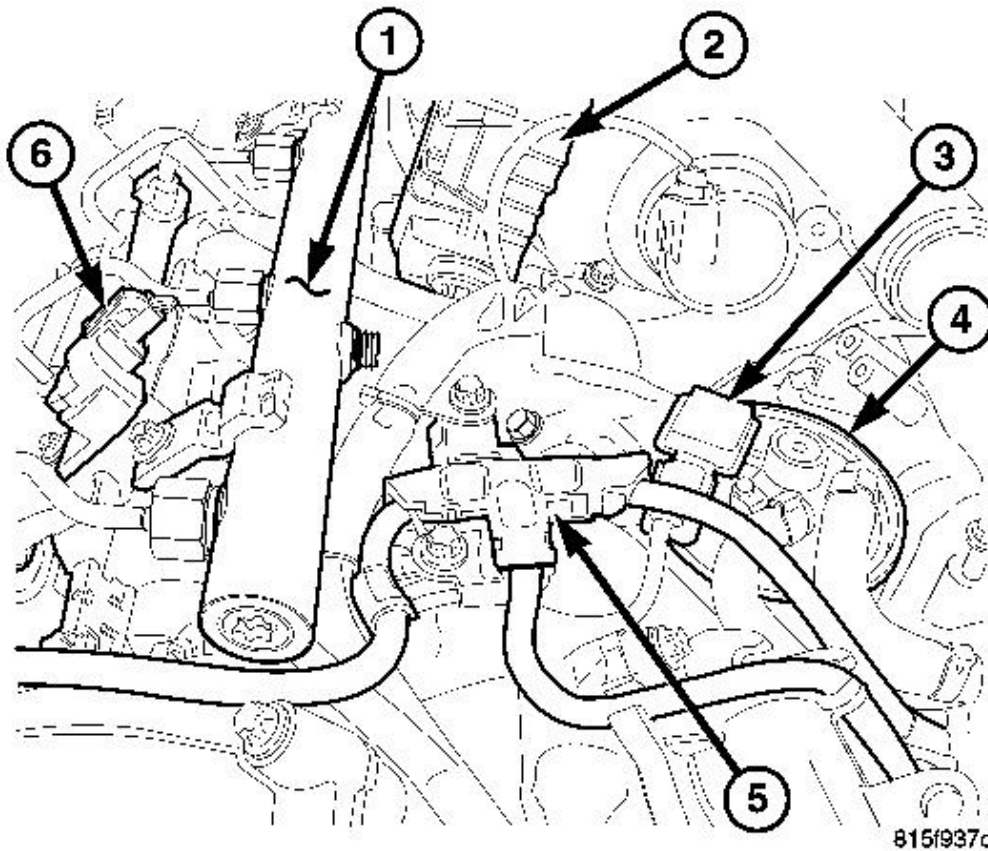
Right Fuel Rail, Turbocharger Servo Motor, Water In Fuel Sensor, Fuel Filter, Return Fuel Hose Bundle & Camshaft Position Sensor
